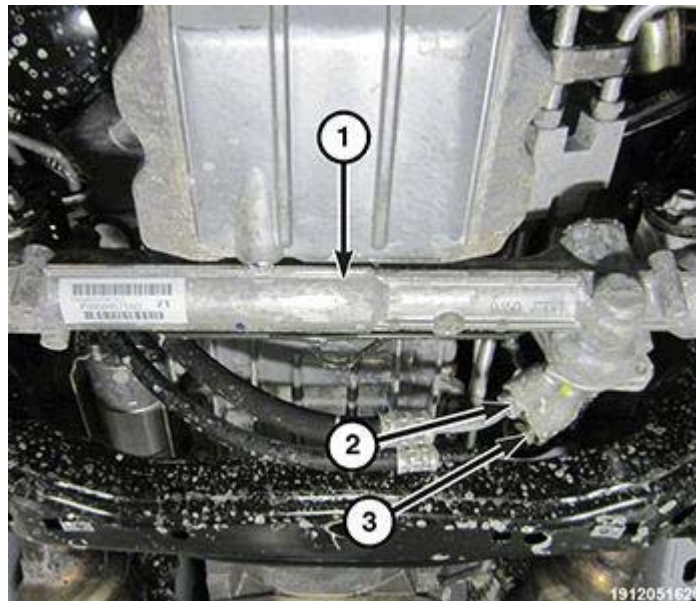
Steering Gear, Pressure Hose & Return Hose
